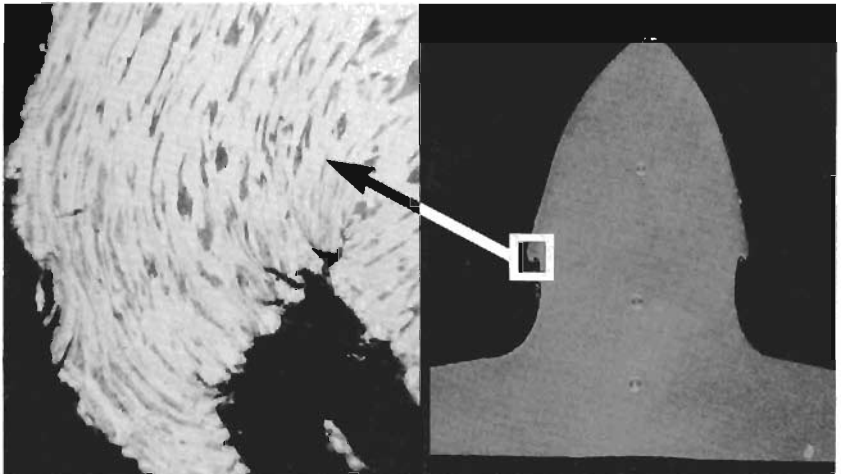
A gear made from C1019 carbon steel (annealed) used to replace an SAE 8620 alloy steel (carburized).
